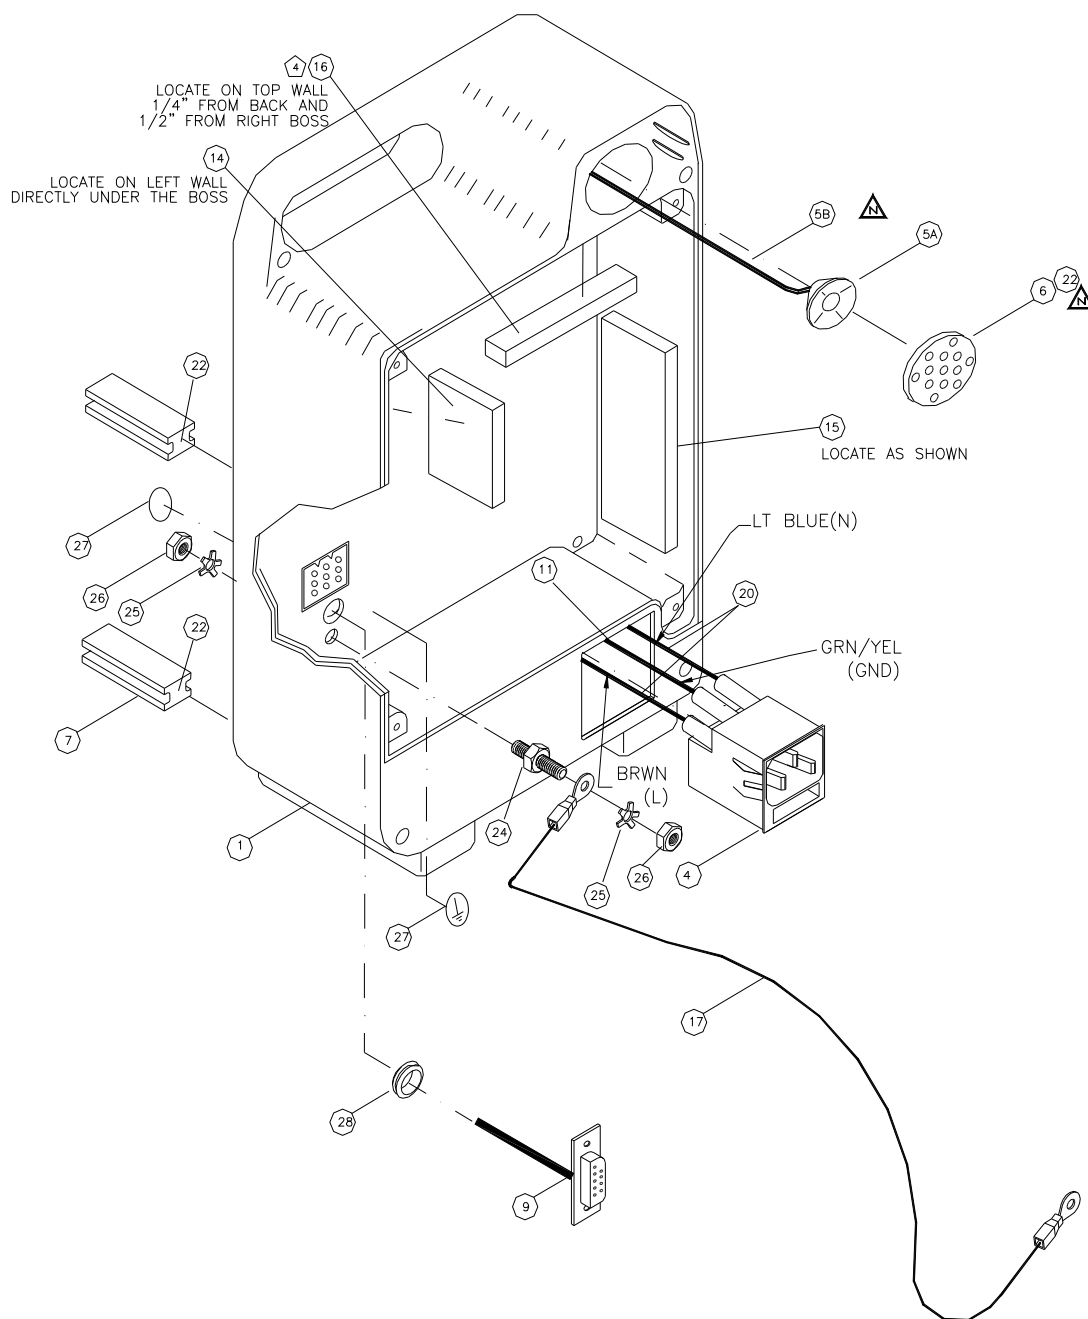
PUMP ASSEMBLY (DWG 35005-1 Rev. K)
